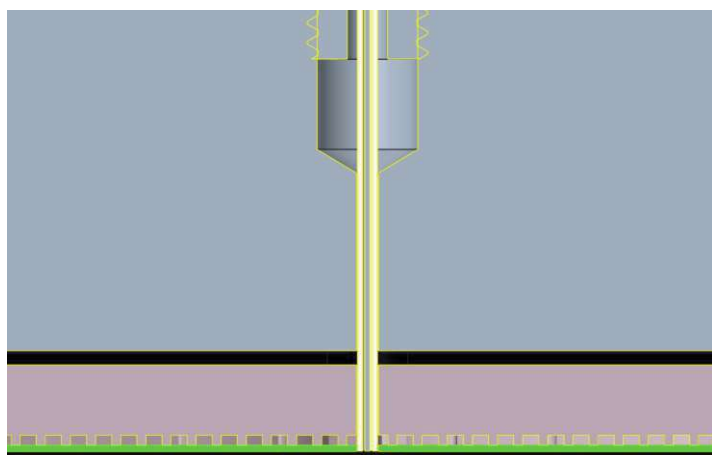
Cross-sectional diagram of the reference electrode assembly
